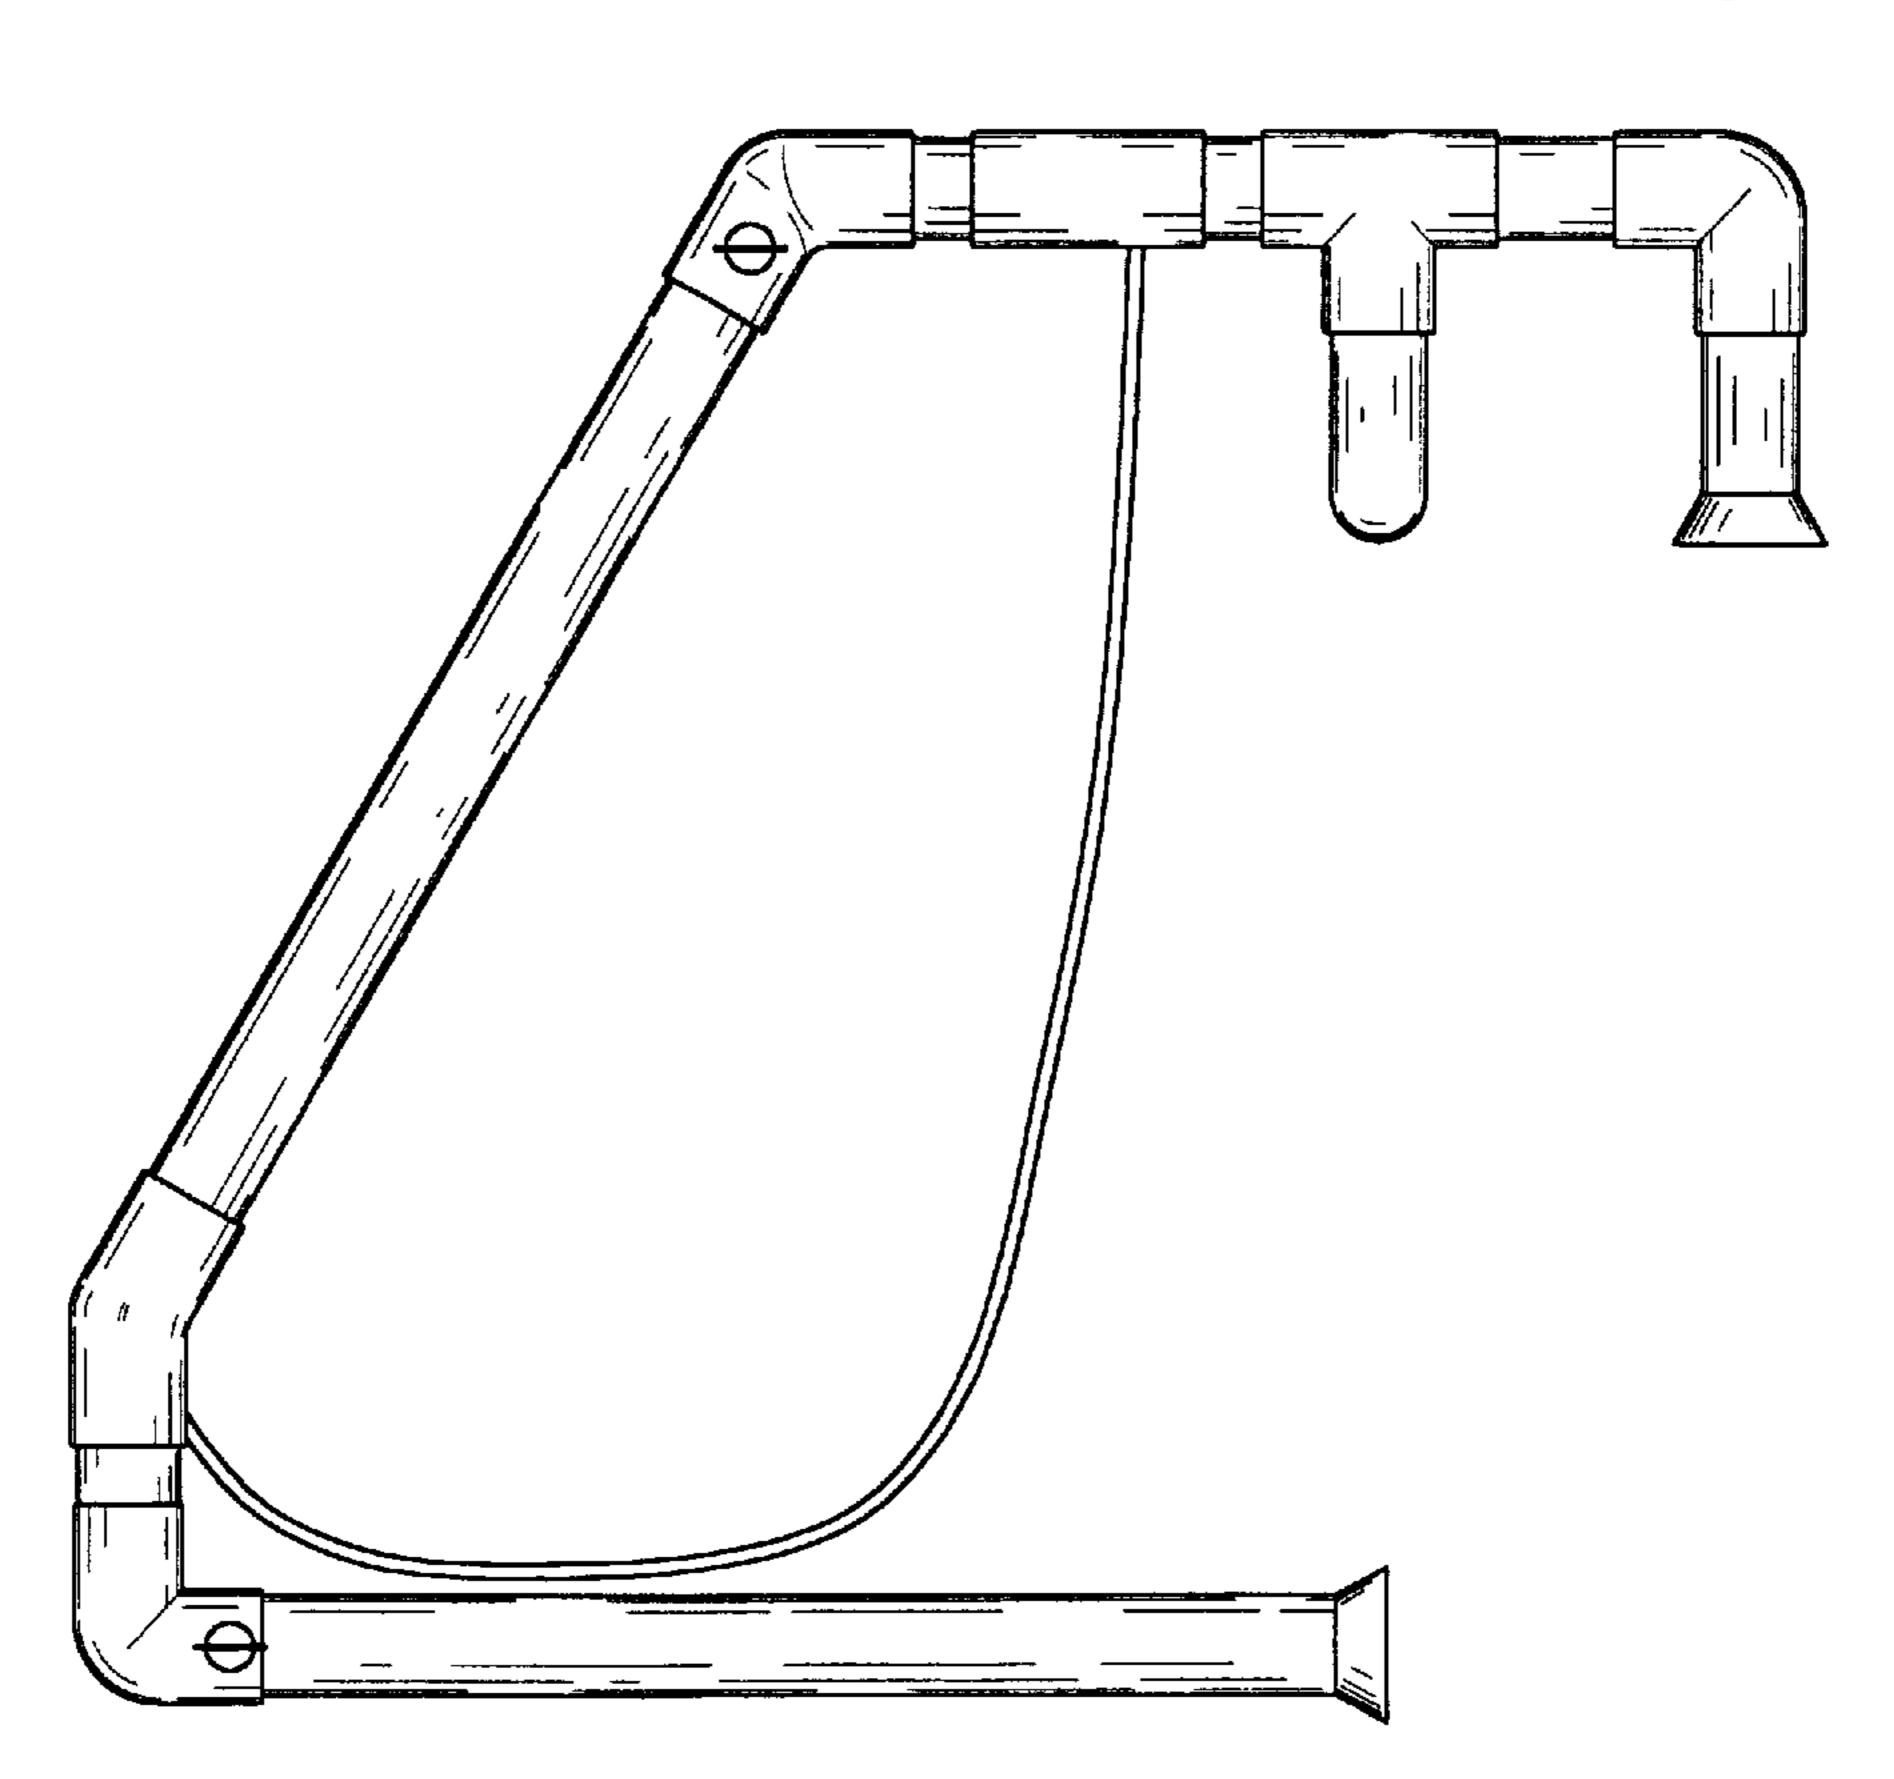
is a back elevational view of the immersible pool side chair of FIG. 1;
